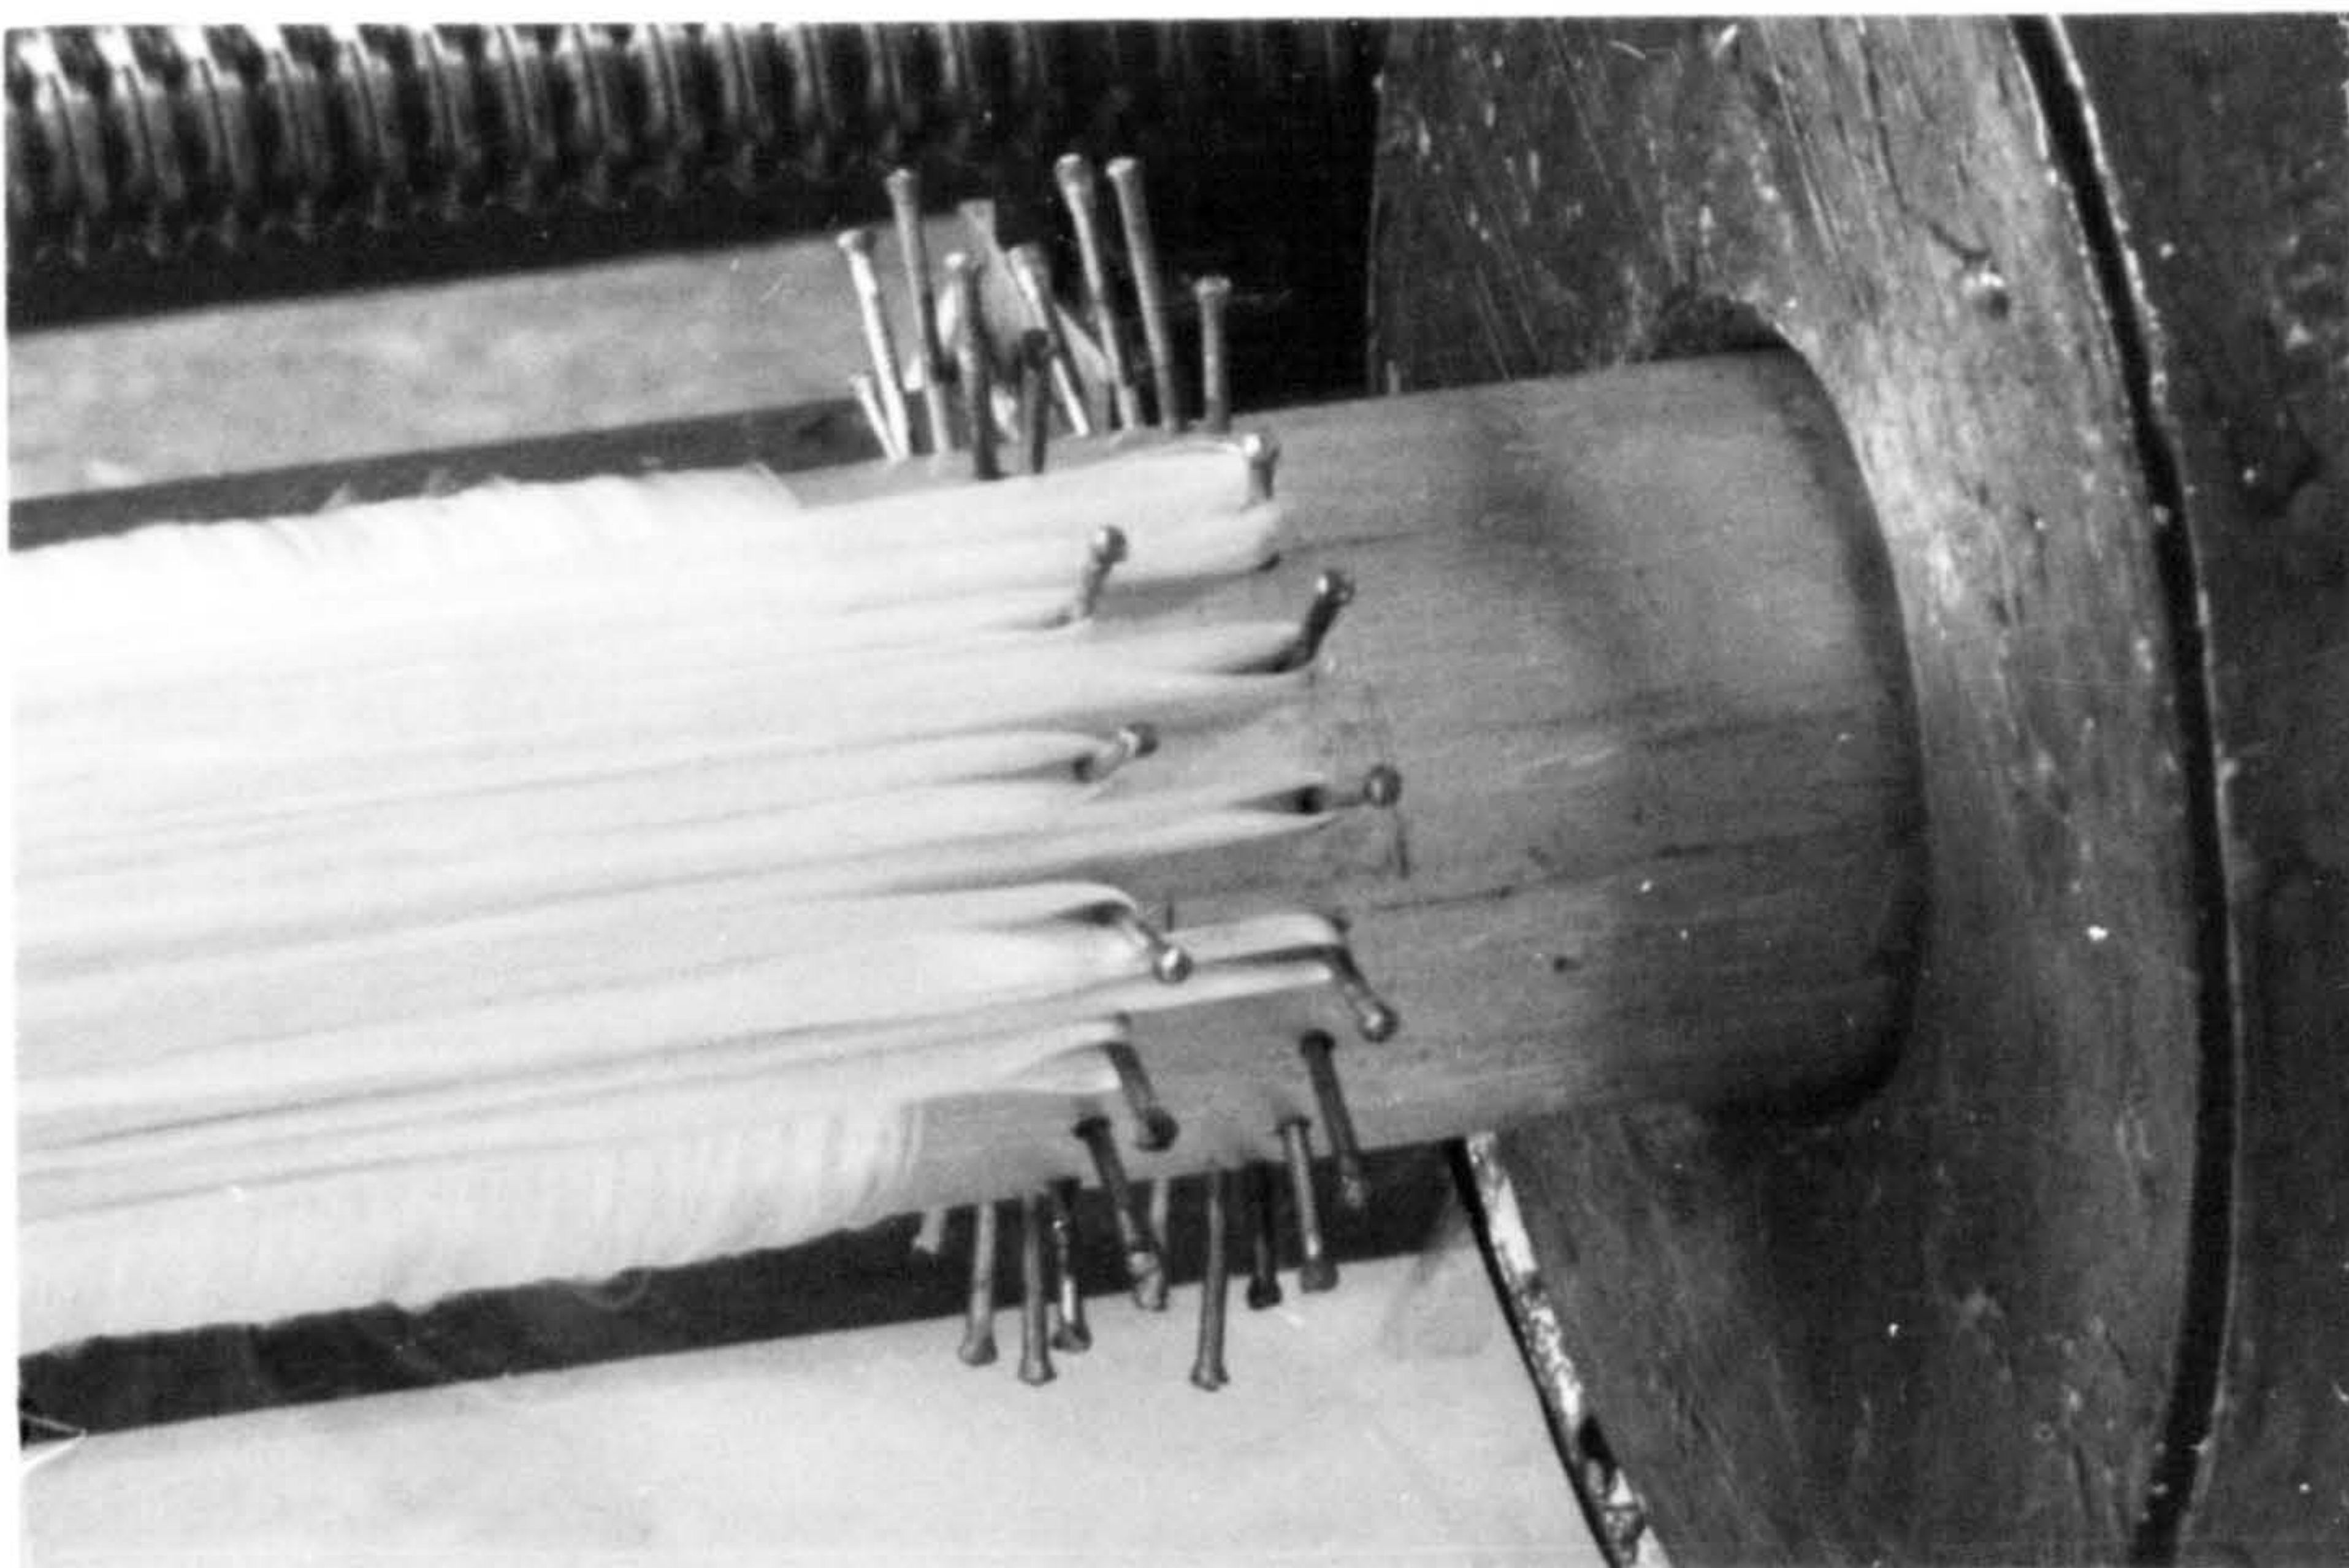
End of mandrel showing pins locating the axial fibres.
